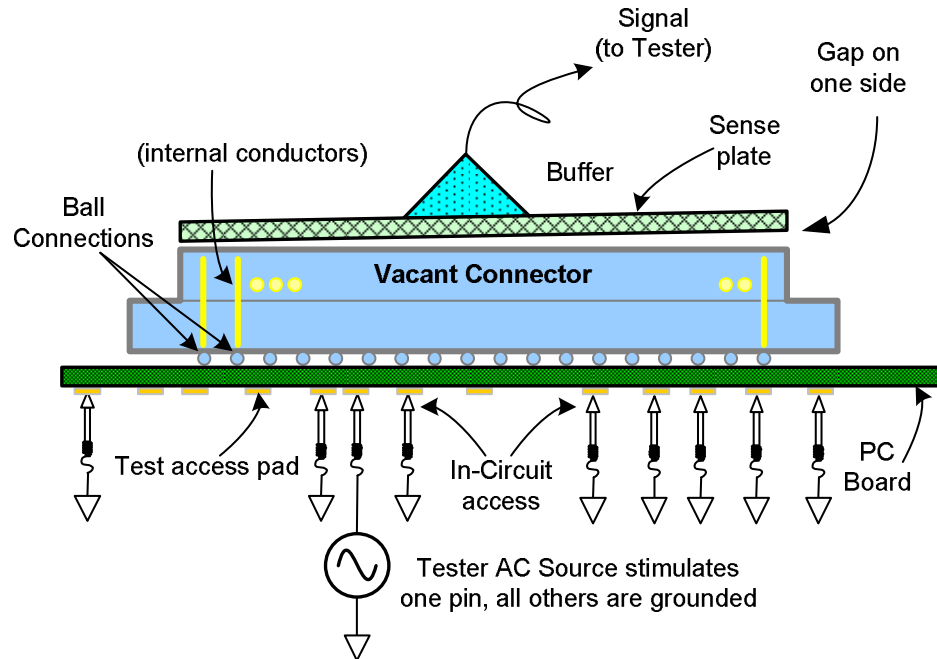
1 Testjet with mechanical 'tilt' on the sense plate [Courtesy of K. Parker, Agilent Technologies]
